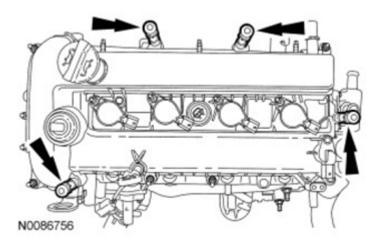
Locating Engine Cover Studs Courtesy of FORD MOTOR CO.
